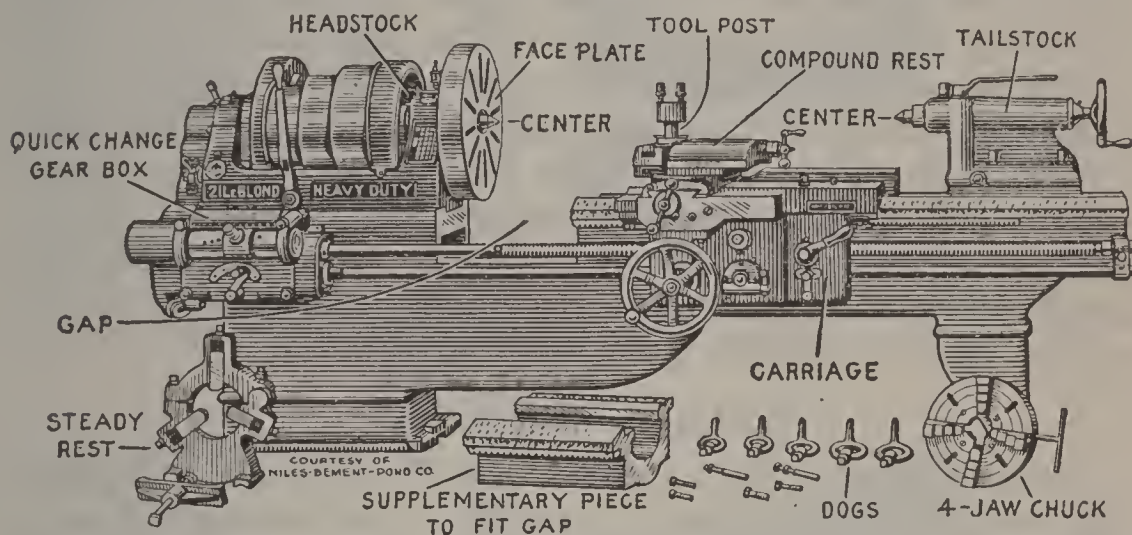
GAP LATHE WITH EQUIPMENT FOR AUTOMOBILE REPAIR WORK
